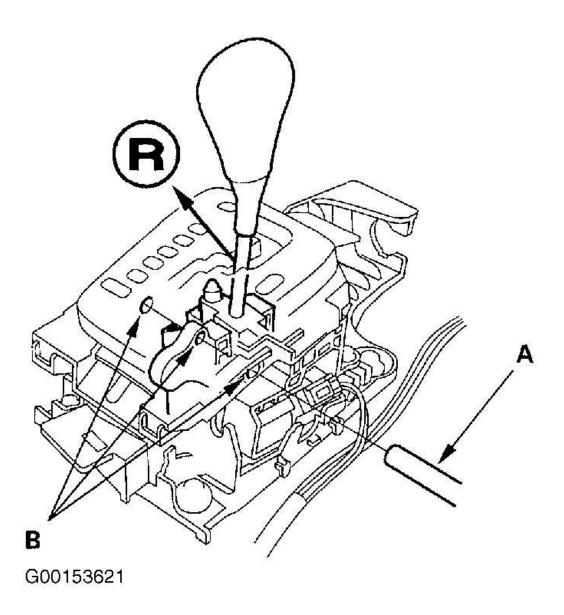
Aligning Gearshift Lever Assembly In "R" Position Courtesy of AMERICAN HONDA MOTOR CO., INC.
